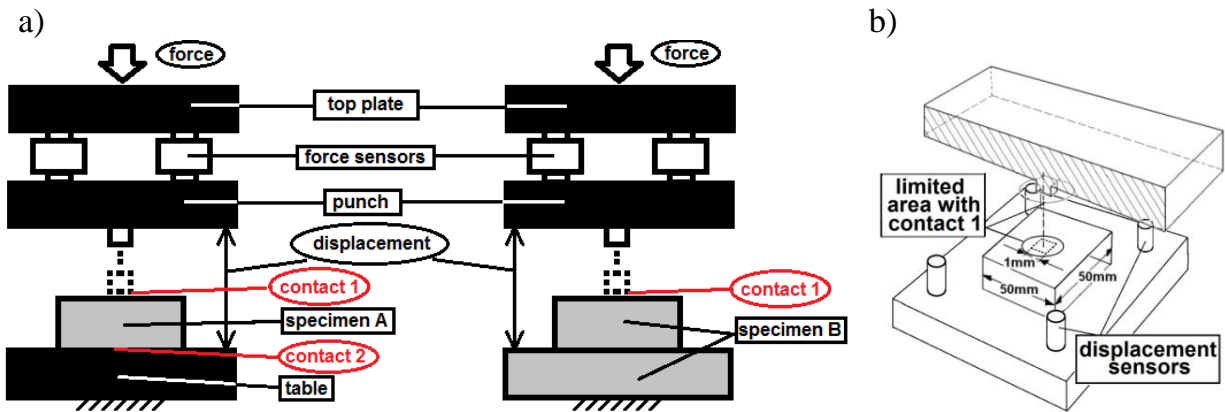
Specimen/punch system: a) contact loading, b) contact between punch and specimen B
